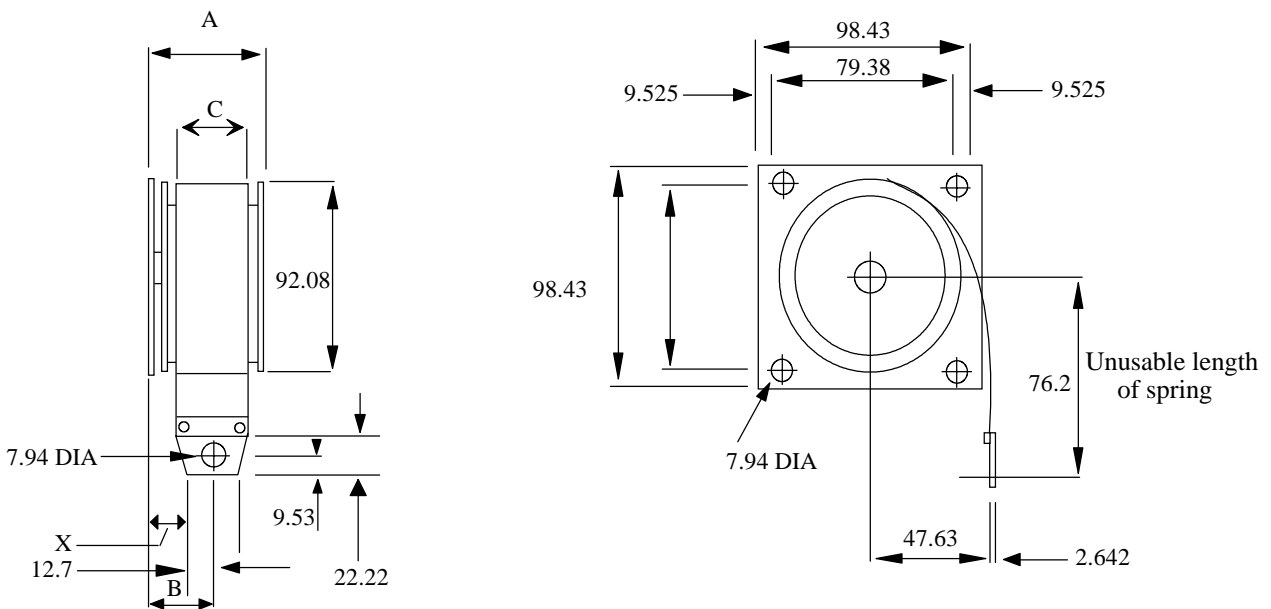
Orthographic drawing of a similar type of spring (Please Note: All dimension are in mm)
